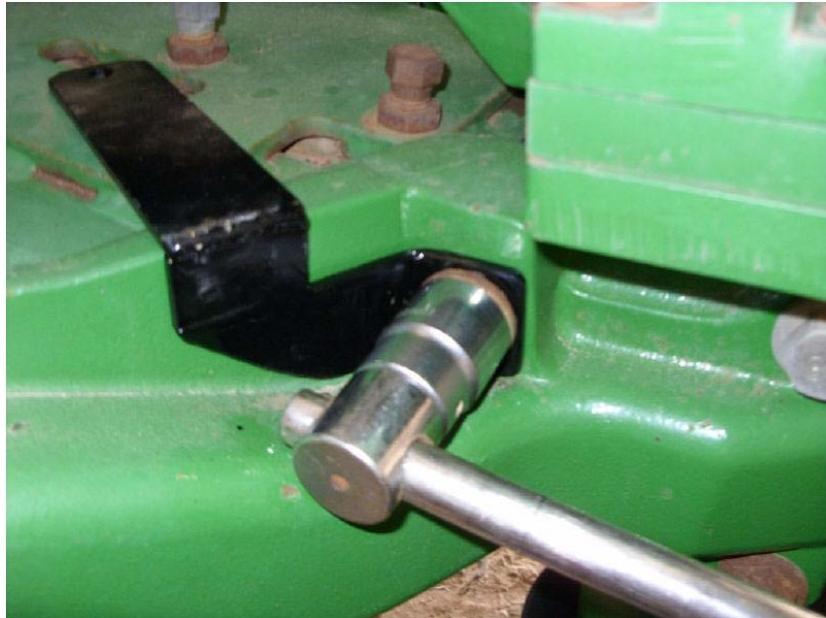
Removing the Linkage Bracket Mounting Bolt
